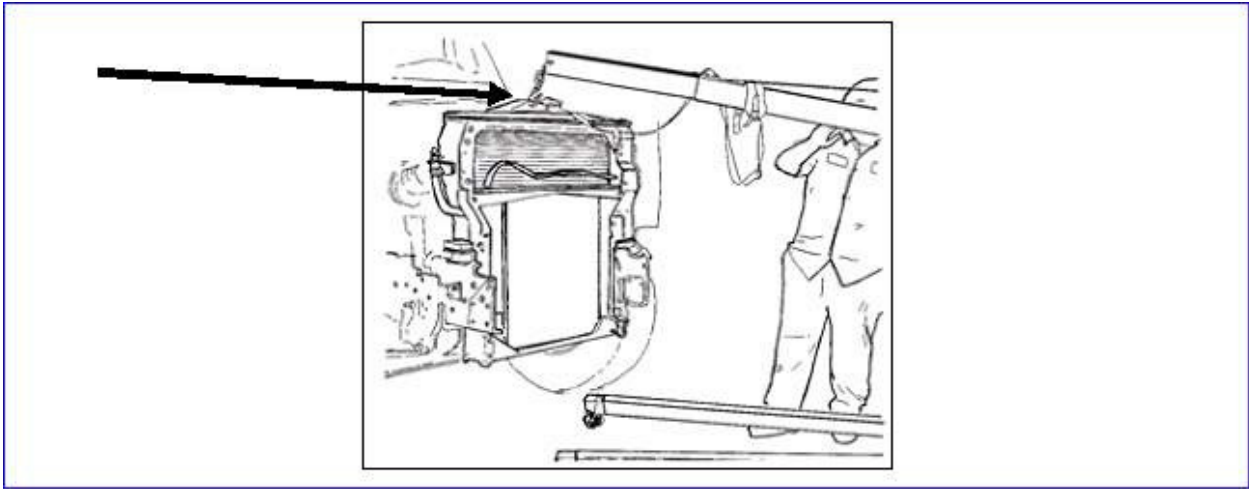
Radiator Mounting Bracket and Bushing (Driver's Side Shown)
